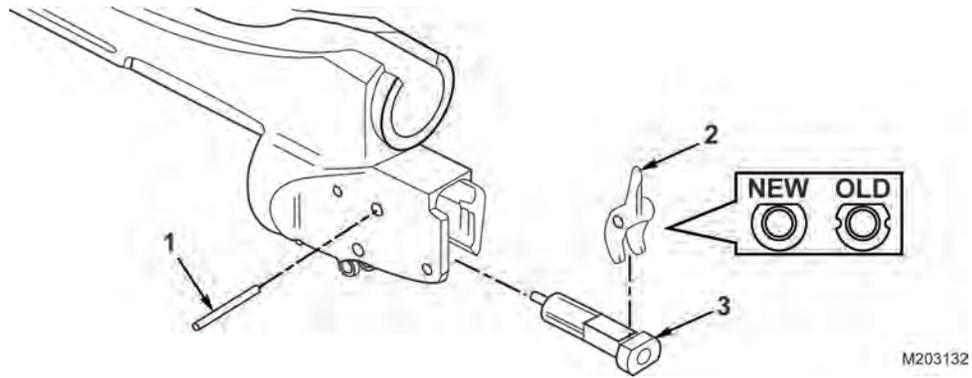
Spring Pin, Cocking Lever, and Firing Pin.
